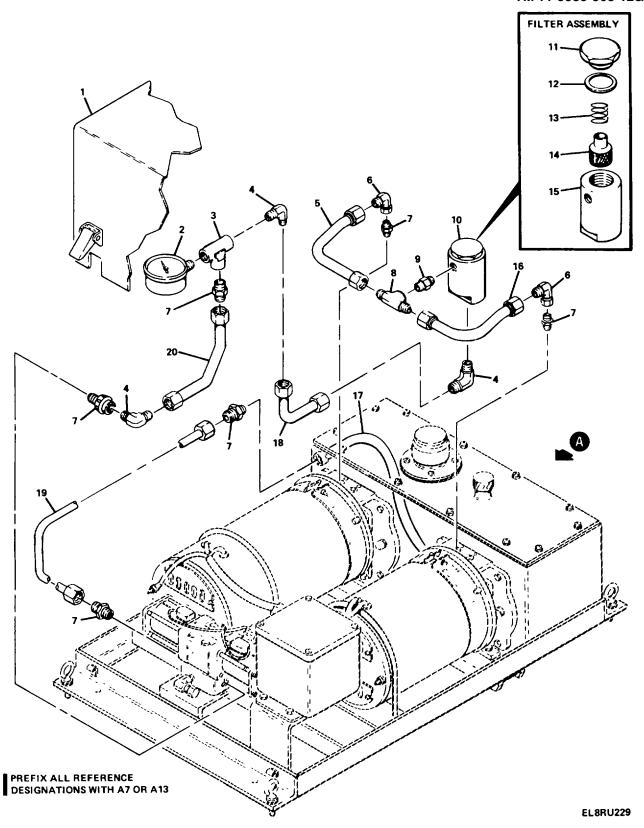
Hydraulic Component Assembly MX-10213/G (Sheet 1 of 3)
